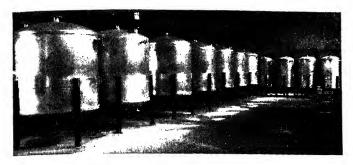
Copper vessels fabricated by silver soldering with the oxy-acetylene flame.
